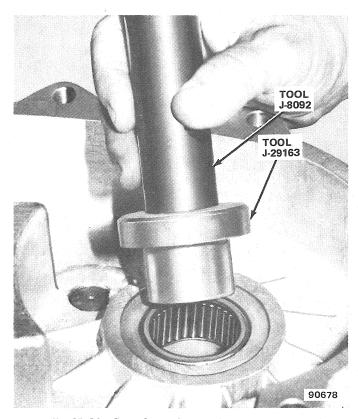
D-30 Front Output Shaft Rear Bearing Installation
